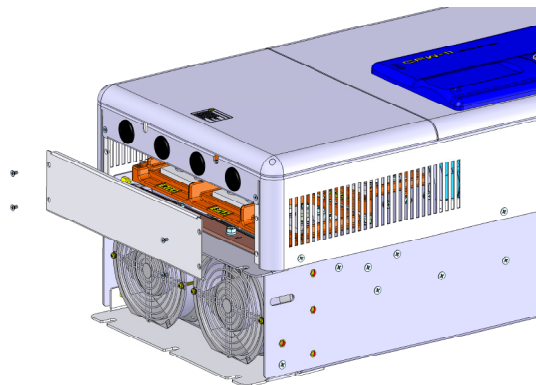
Removal of the bottom plate, to access the power terminals - frame sizes F and G
